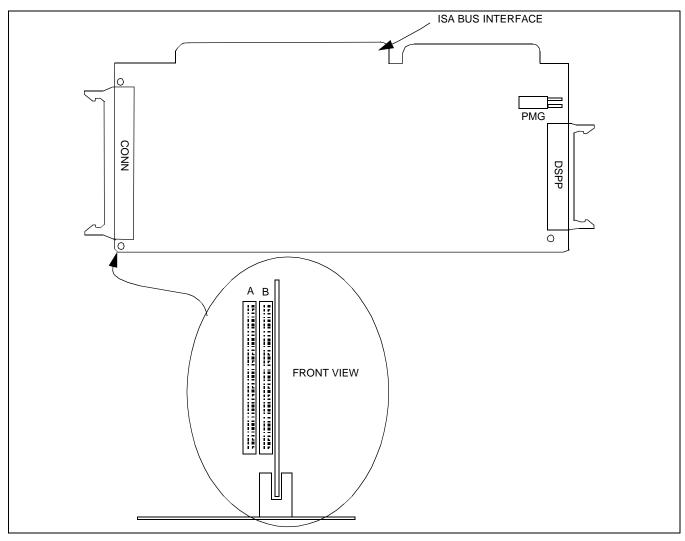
Face Layout of PZ-GT16 (ISAGT)
